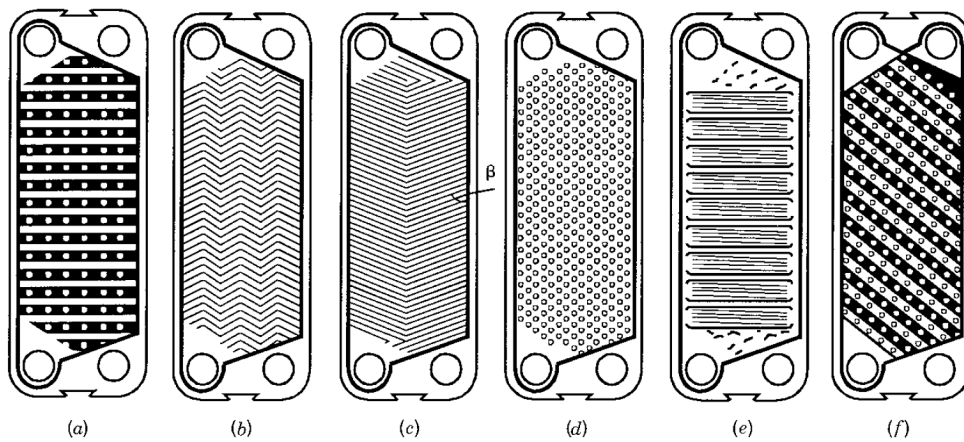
Plate patterns: (a) washboard; (b) zigzag; (c) chevron or herringbone; (d) protrusions and depressions; (e) washboard with secondary corrugations; (f) oblique washboard [24].
